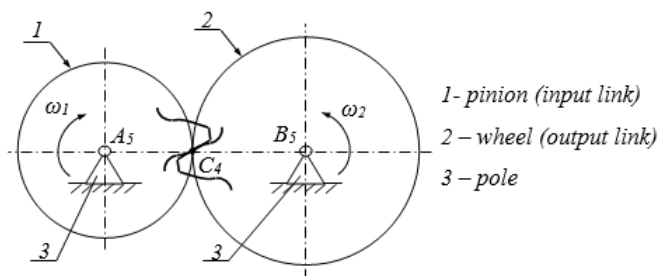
Kinematic diagram of a simple gear mechanism
